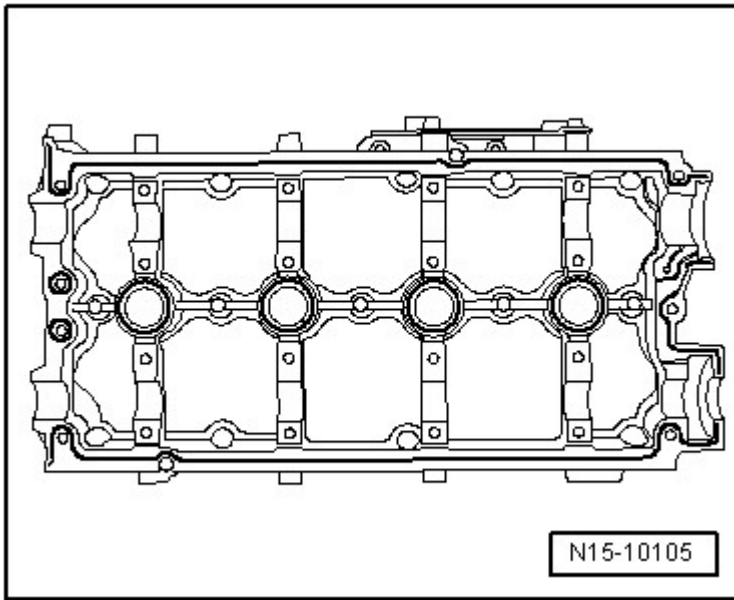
Identifying Old Sealant On Guide Frame Groove And From Sealing Surfaces
